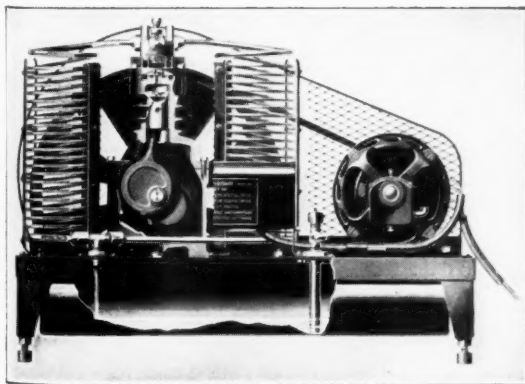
Showing an adaptation of the roller bearing to a small single cylinder ammonia compressor. An interesting point is the small amount of space occupied by such bearings.
